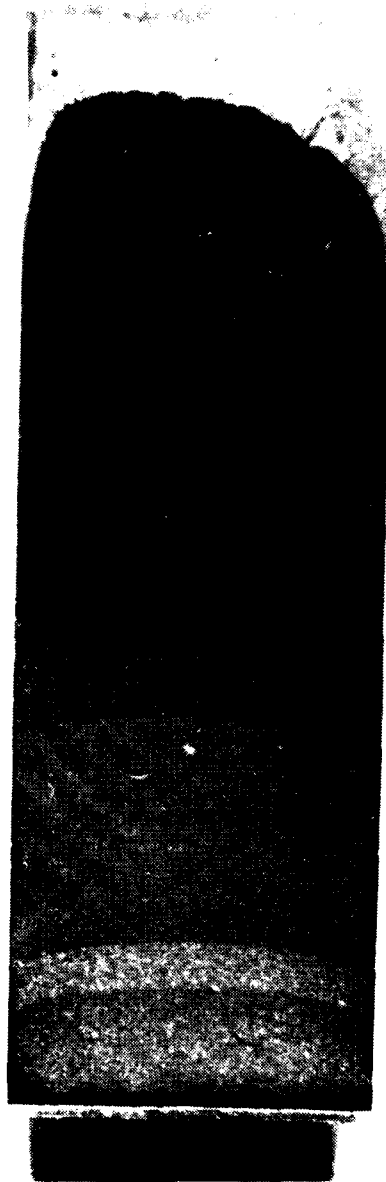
Fracture Surface - Ring Specimen 8-1
